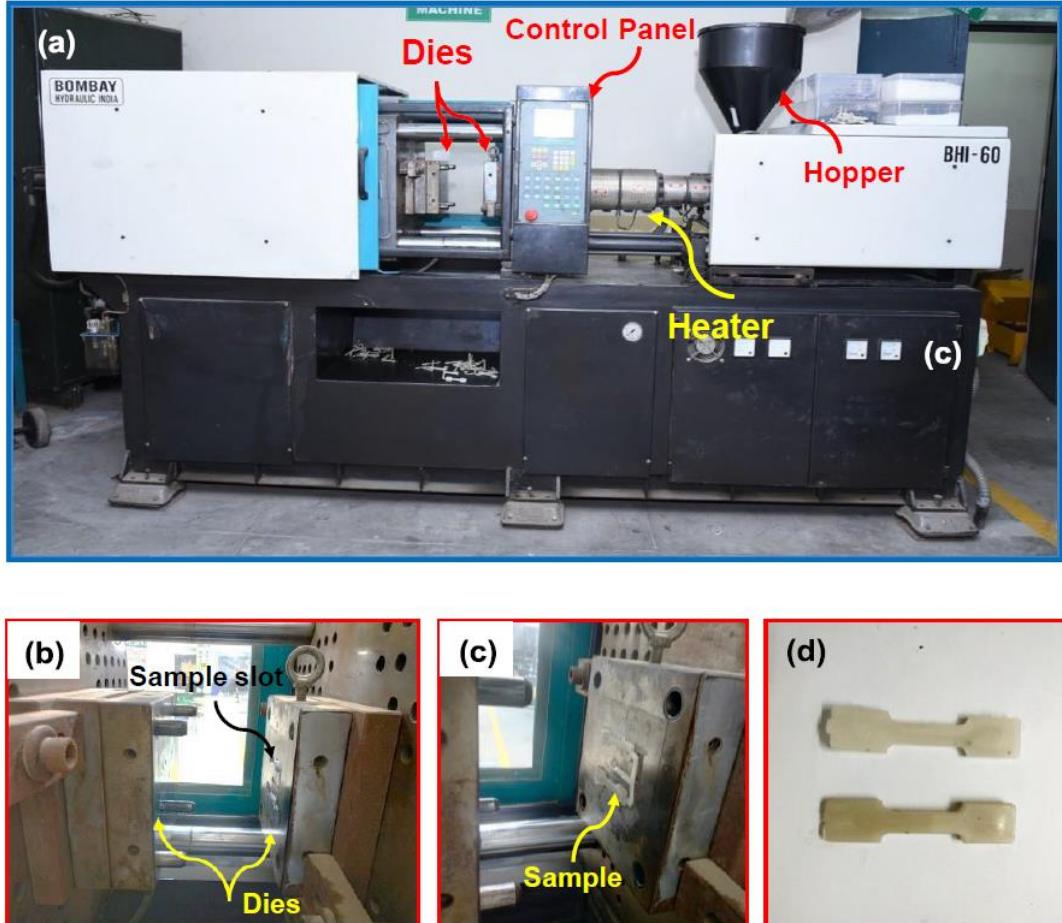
(a) Injection moulding machine, (b) dies, (c, d) fabricated samples.
